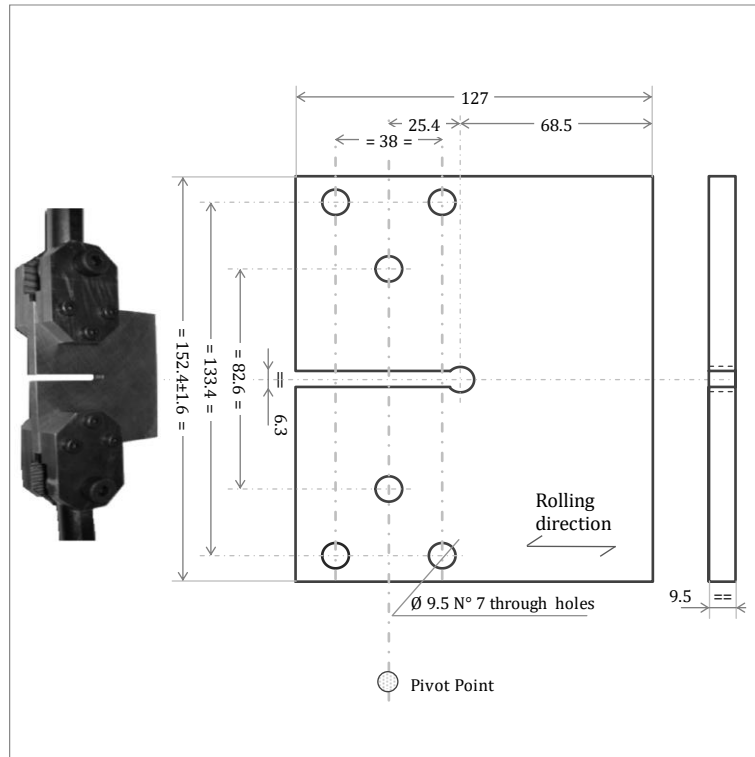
SAE keyhole test specimen: (Left) experiment setup and (Right) dimensioned drawing. Units in mm
